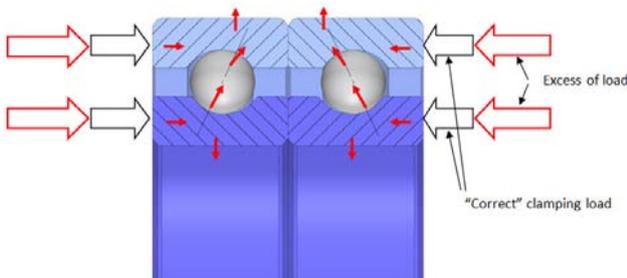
Influence of excessive clamping load on inner and outer rings (back-to-back configuration.)
